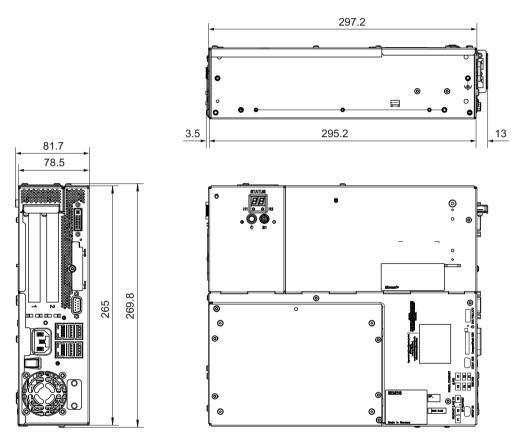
PCU 50.5 dimension drawing for mounting without ETH strain relief
